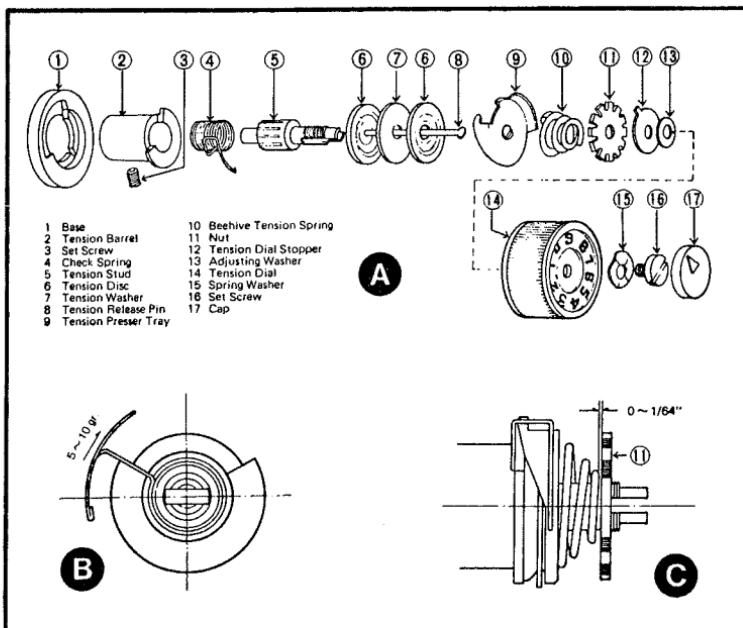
If you have purchased a used White oscillating shuttle machine, you may wonder if the tension mechanism has been disassembled and incorrectly reassembled. Be sure to differentiate between the thread check spring 4, and the tension spring 10 (called the beehive tension spring), when reading the instructions.
